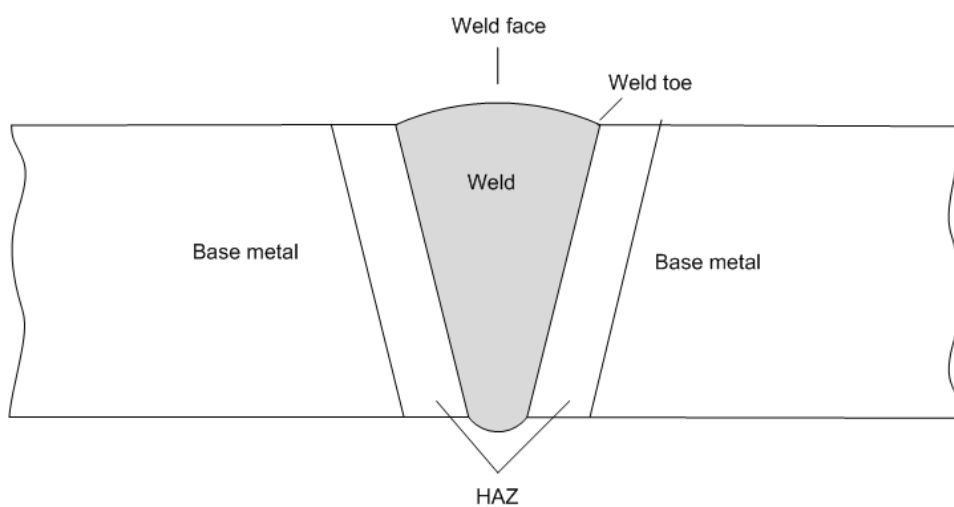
An schematic illustration of a butt weld. The HAZ is the heat affected zone.
